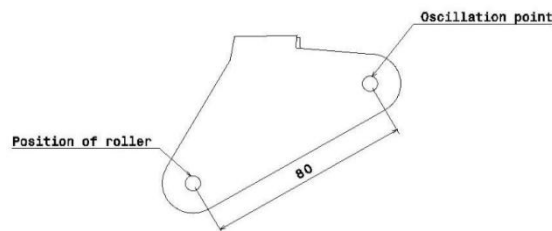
Schematic of swinging follower used in the seed plucking mechanism
